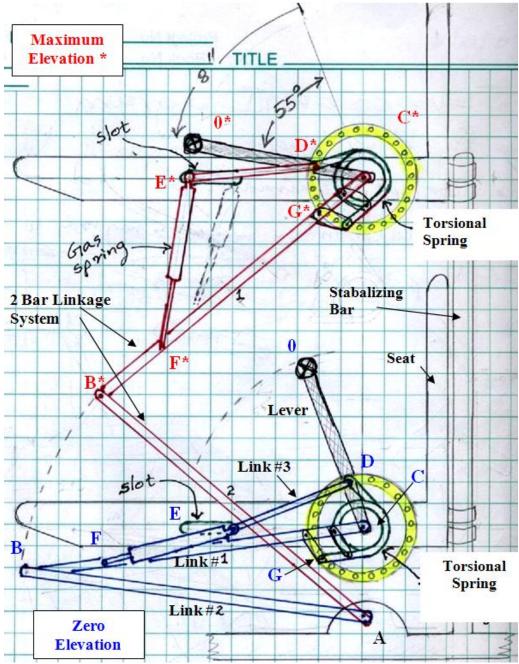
Torsional springs and gas springs integrated elevating linkage system.
